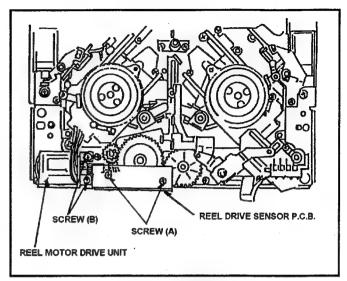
Removal of Reel Drive Motor Unit
